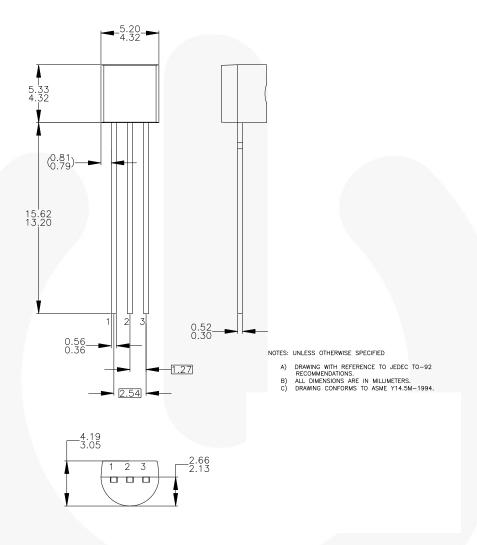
3LD, TO-92, MOLDED STD STRAIGHT LD(NO EOL CODE)
